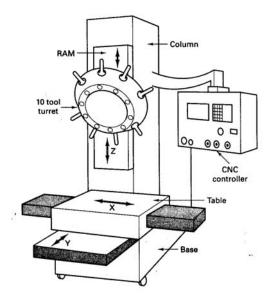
Tool mounting in turret type CNC drilling machine.
